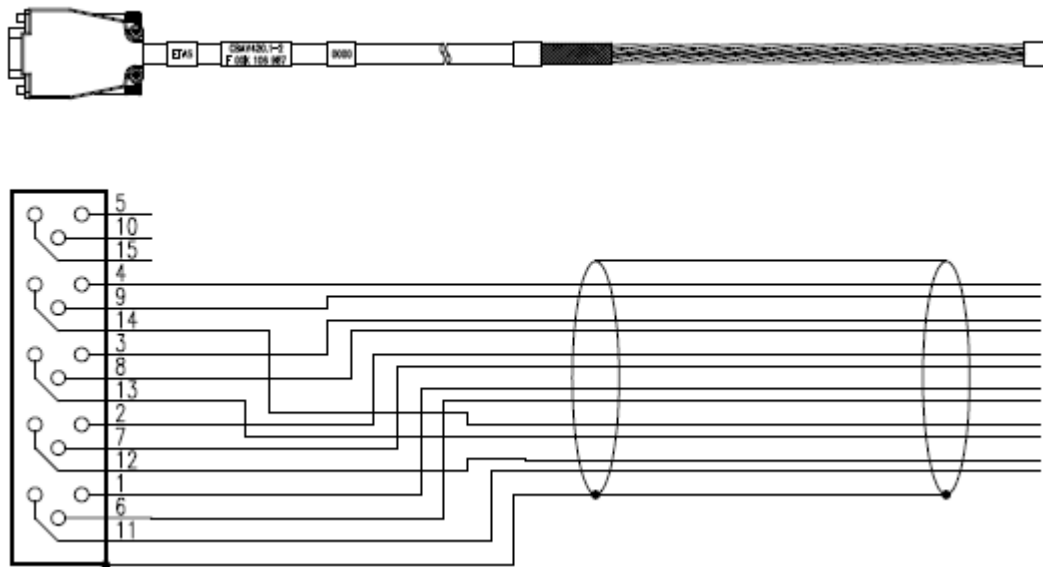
CBAV420.1 cable with wiring plan [272].
